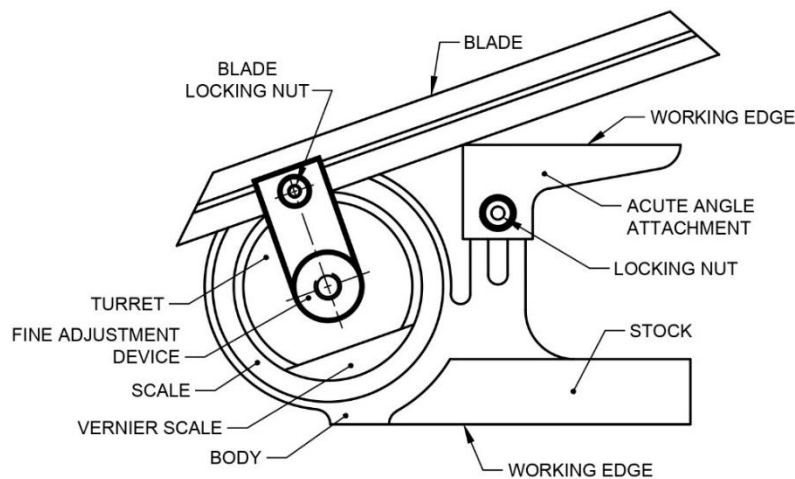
MECHANICAL BEVEL PROTRACTOR
